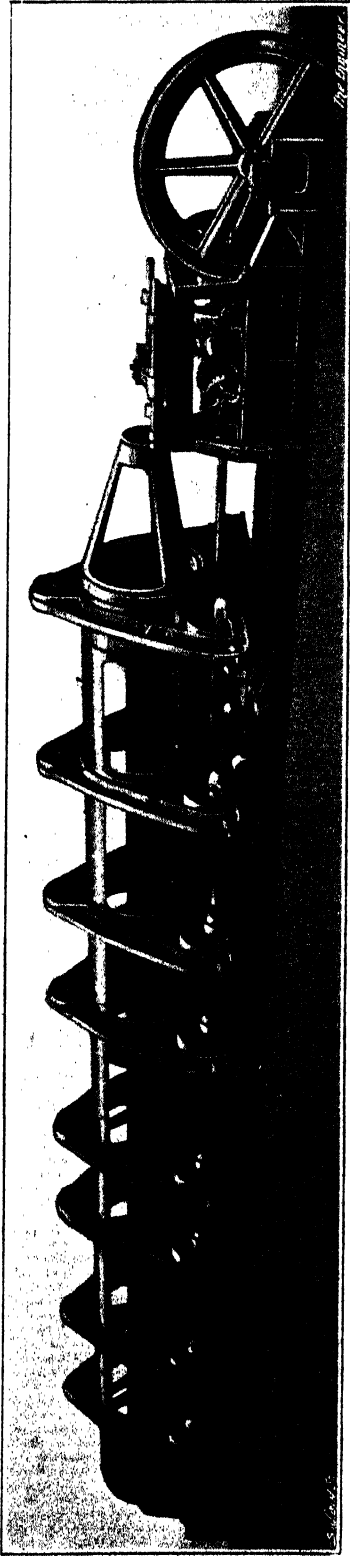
EIGHT-BOBBIN 24-INCH DIAMETER CLOSING MACHINE.
